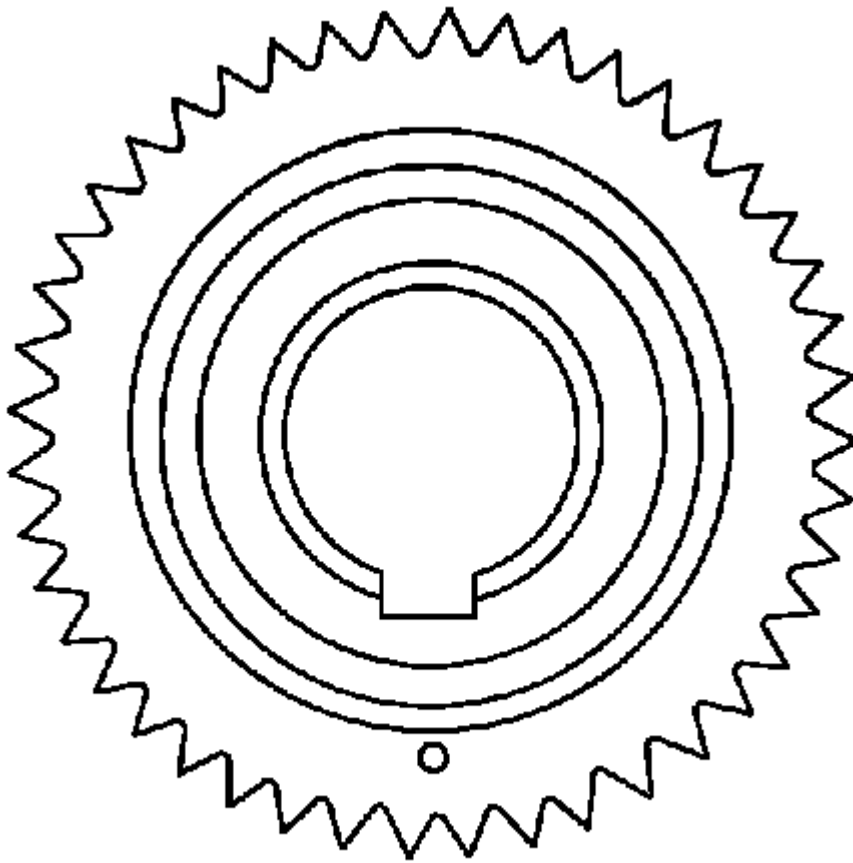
View Of Balance Shaft Driven Gear & Timing Mark
